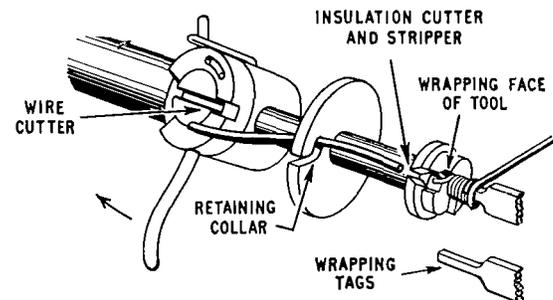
STRIPPING AND WRAPPING TOOL AT COMPLETION OF WRAP
